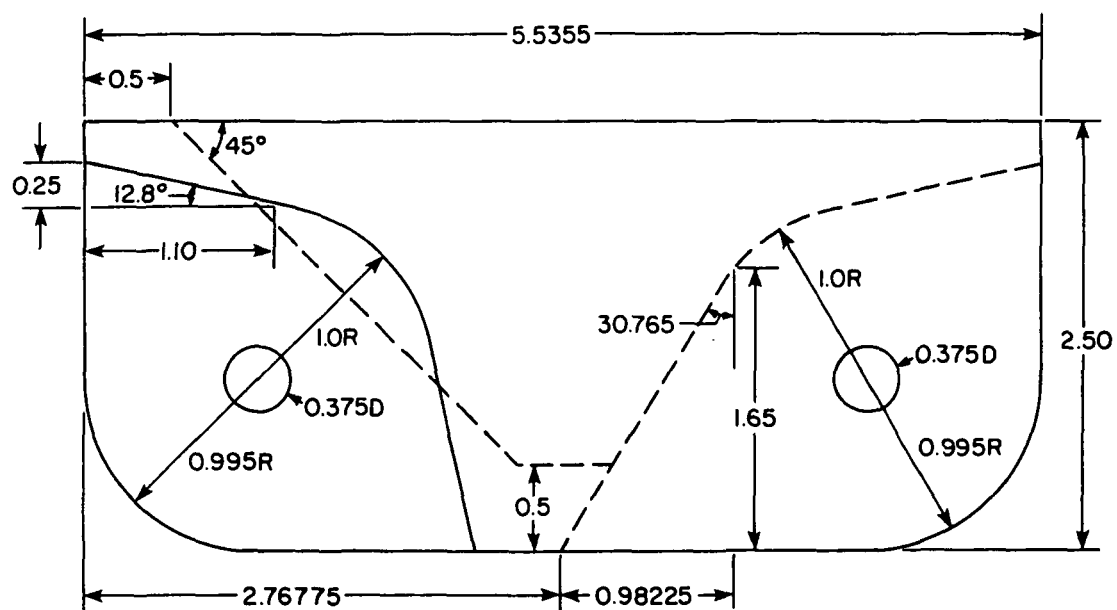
Rigid Rail of the Test Fixture (Top View)
